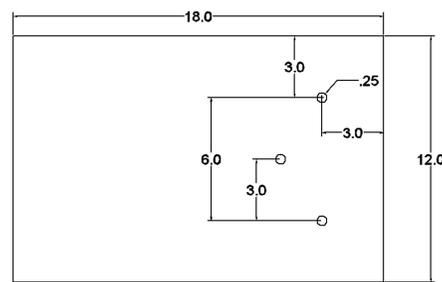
Shows the plate designed to be welded onto the bottom of the chassis dyno and secured down with concrete fasteners.
